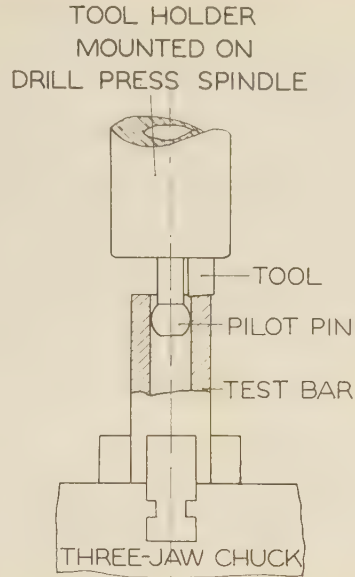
TOOL AND TEST BAR AT BEGINNING OF CUT IN PENETRATION TEST
